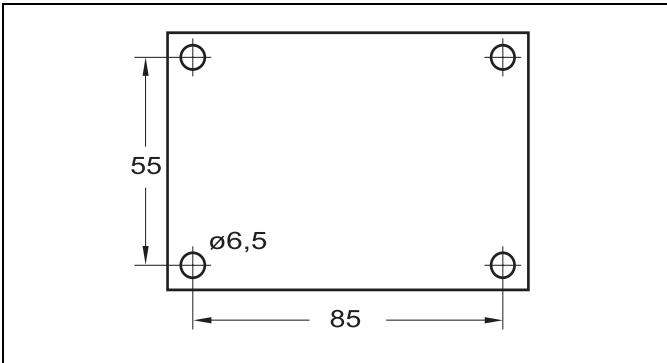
Hole pattern for the stand for the U 4854 circulating pump
